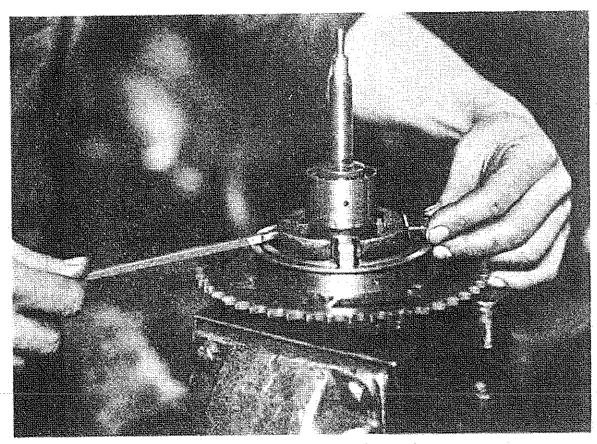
How to LOCATE THRUST LEVER SCREWS.
